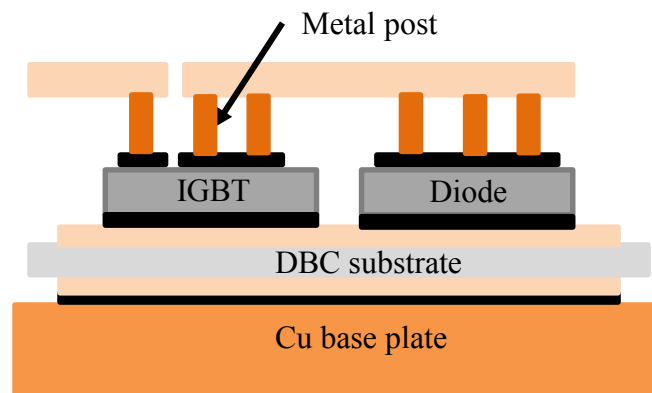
Metal post bonding concept for power module assembly [15]
